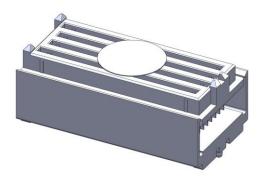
Bottom Connector SEAM-20-09.0-X-10-2-A
